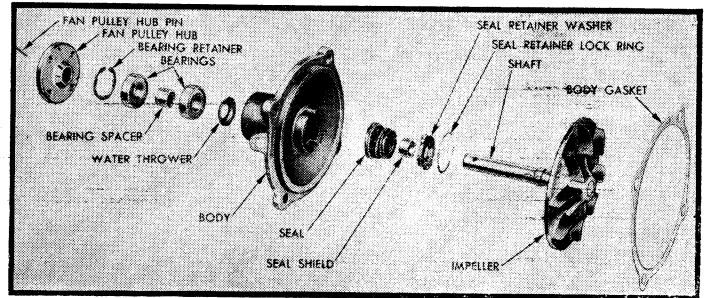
Water pump with removable bearings. Typical of all V8 engines
